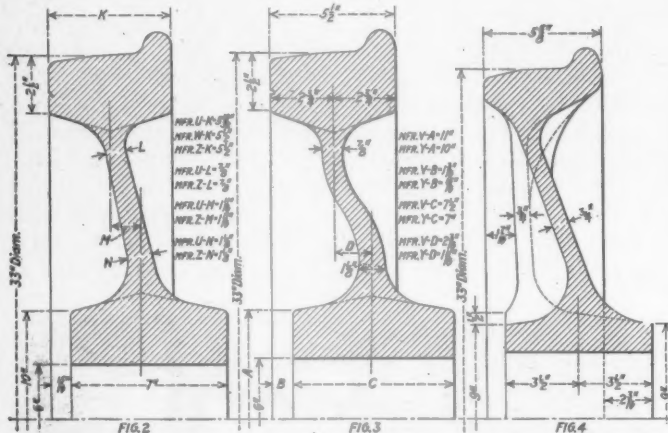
Sections of Forged Wheels of Manufacturers U, W and Z
